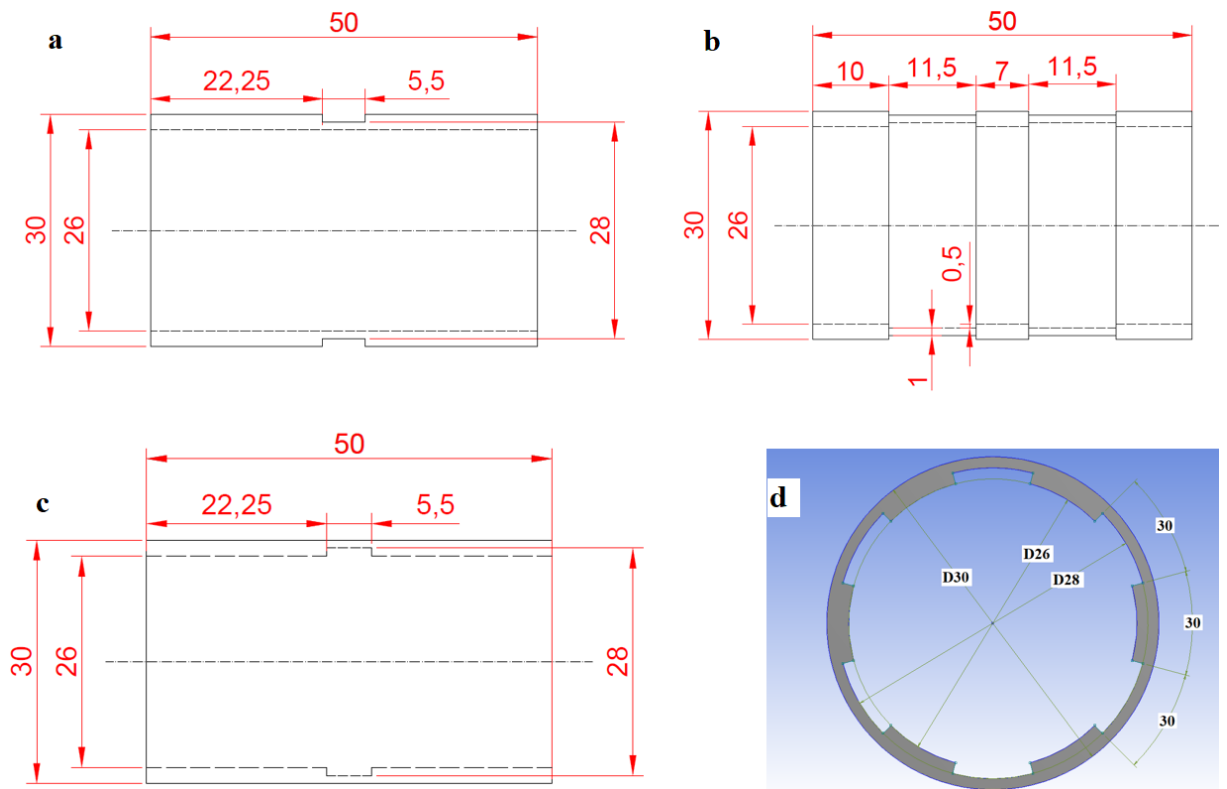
Drawings of the specimens for machining: a: specimen with one external axial step; b: Specimen with two internal-external axial steps; c: specimen with one internal axial step; d: specimen with six internal circumferential steps.
